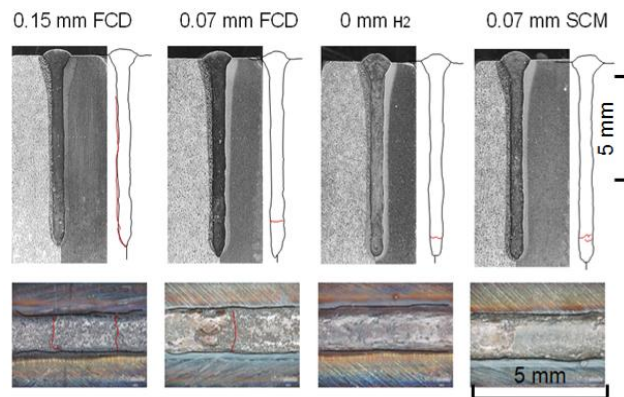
Metallographic cuts and bead photographs of welds created with constant misalignment
